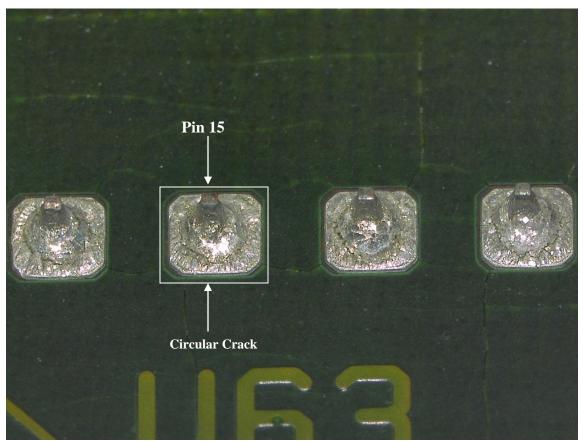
PWB 191 - U63, Pins 14 - 17 (Wave Solder Side, Sn Finish)
